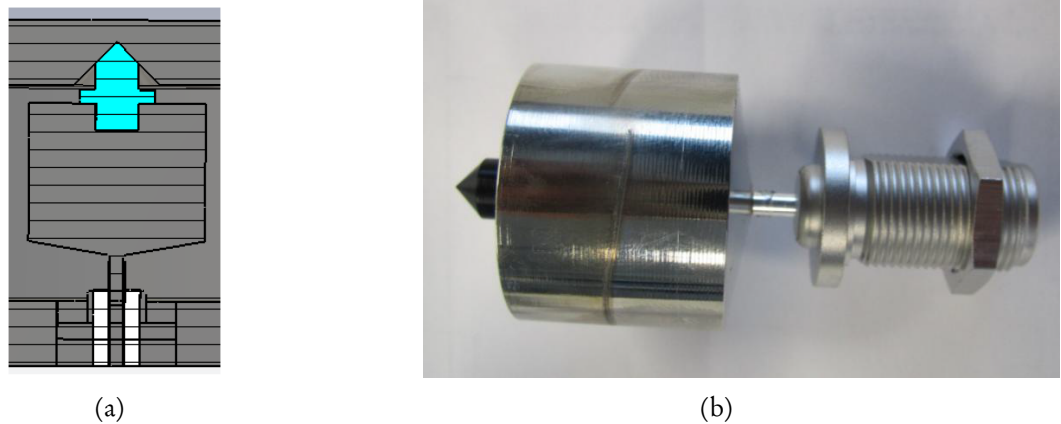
(a) End design of the probe and its output connection and (b) Photography of a probe with its connector welded.
